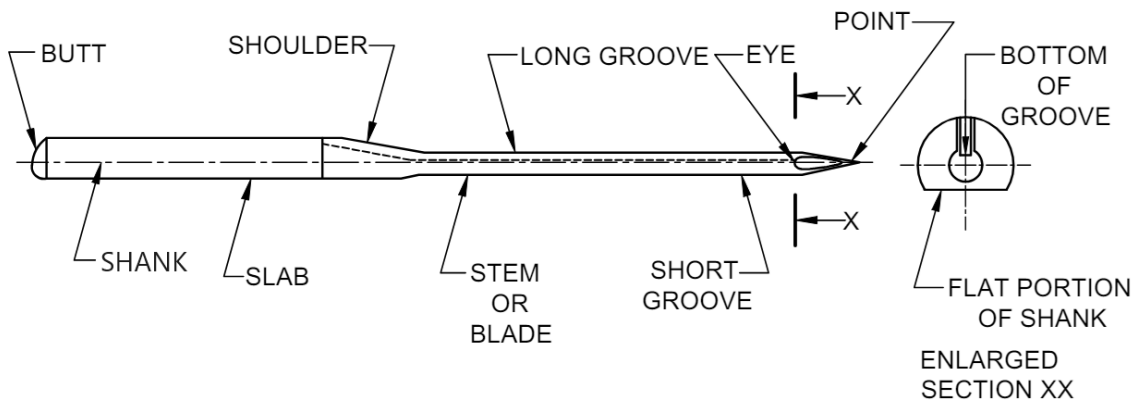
NOMENCLATURE OF SEWING MACHINE NEEDL
